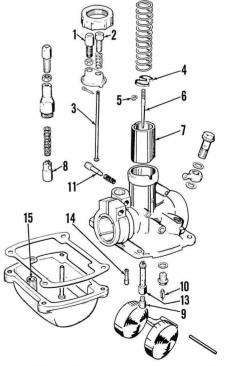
Exploded view of Mikuni VM type carburetor.
